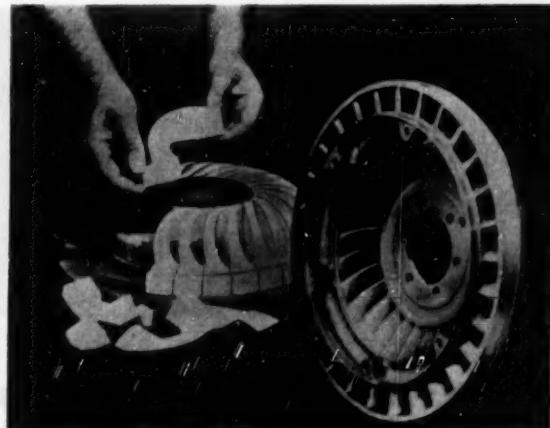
The use of Alcoa's plaster-casting process in the production of intricate automotive torque-converter castings is demonstrated here. The plaster cores, at the left, are used to form the blades on the torque converter casting at right.
